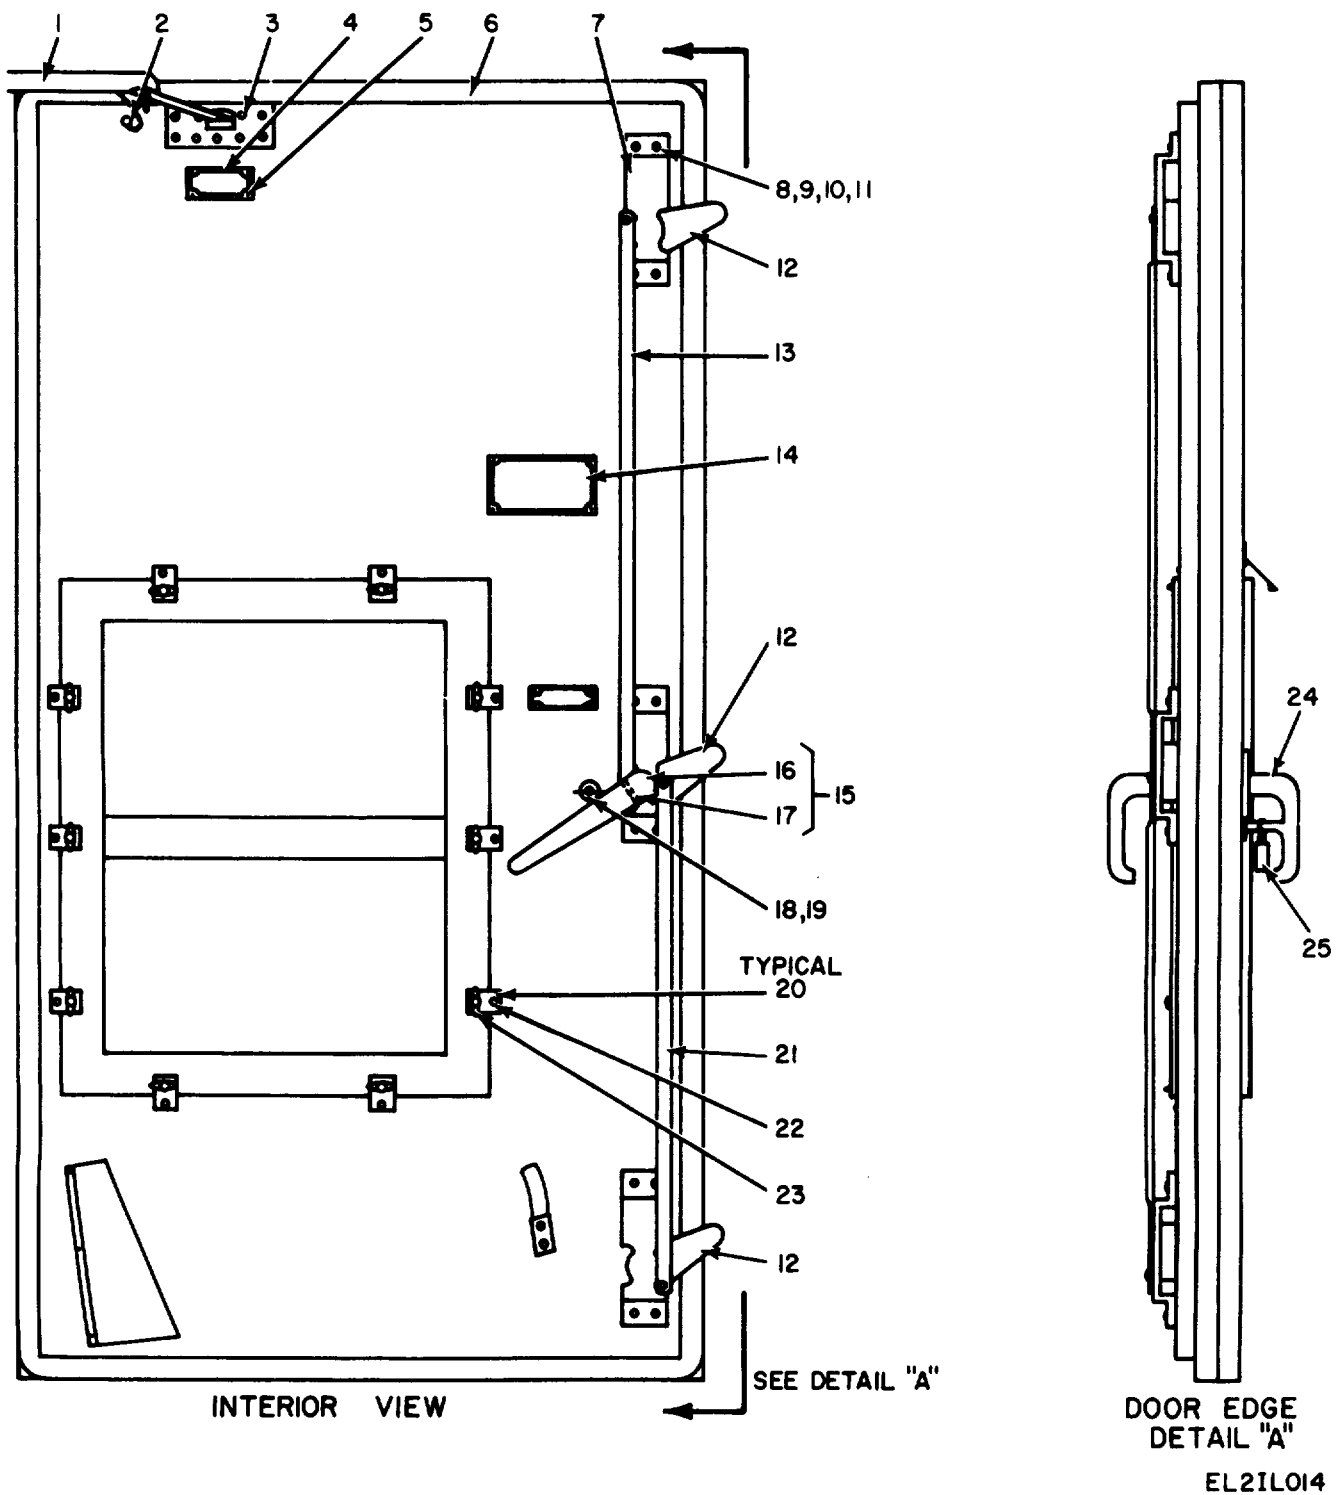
Door Assembly, Interior View, S-280A/G Shelter.
